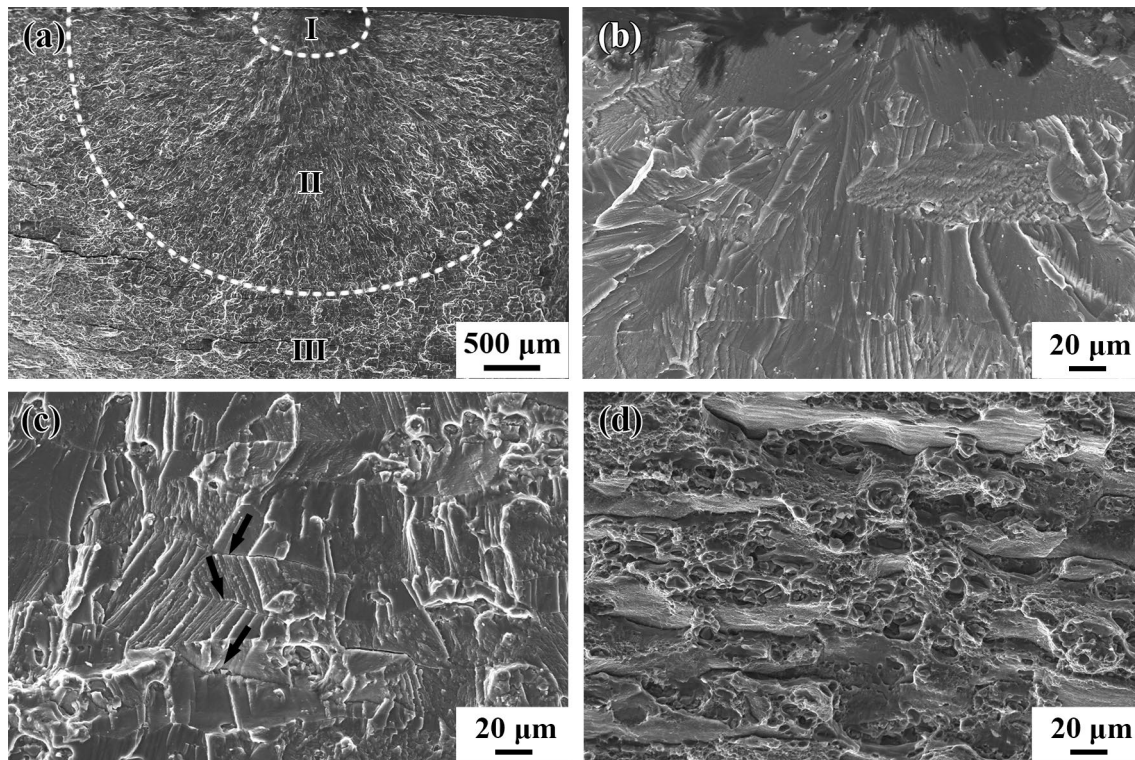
Fracture surface morphologies of BM at a maximum stress of 200 MPa: a low magnification overview, b crack initiation zone, c crack propagation zone, d final fracture zone
